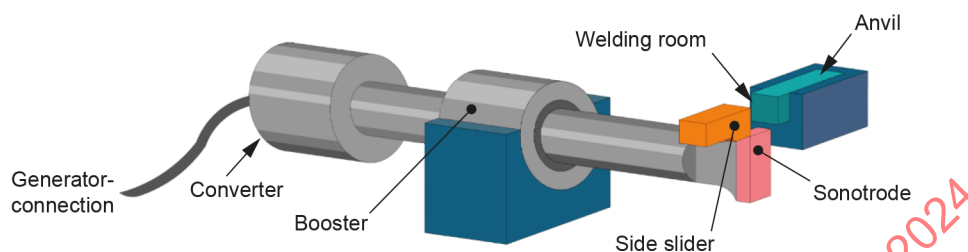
Ultrasonic welding machine designed to make splices between at least two wires
